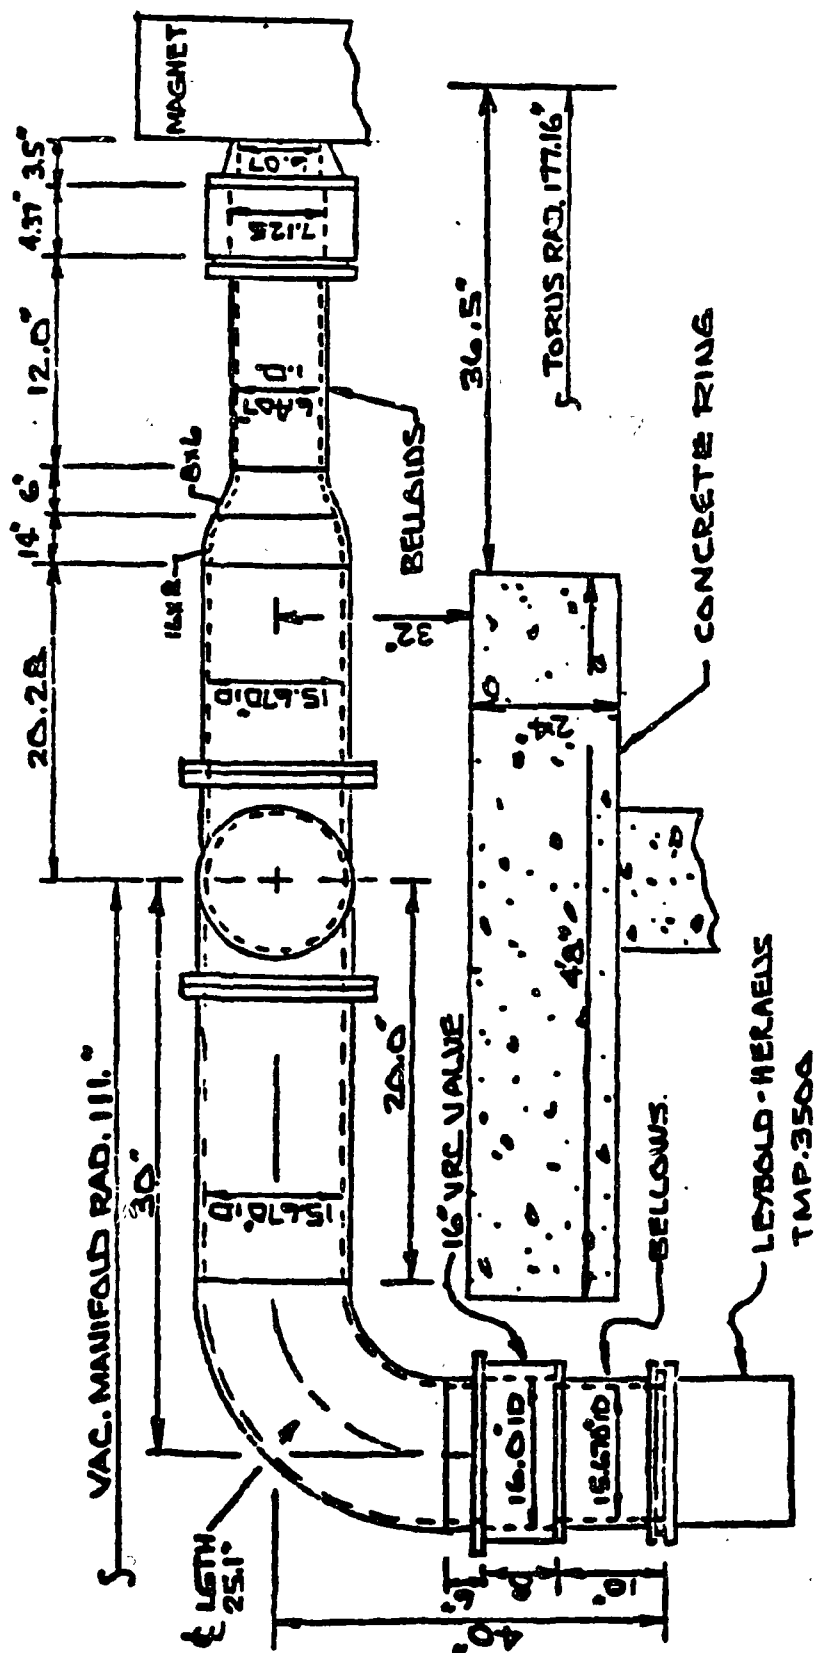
MC DEVAR INBOARD MANIFOLD SYSTEM WITH TMP 3500's at BUCKING RING
